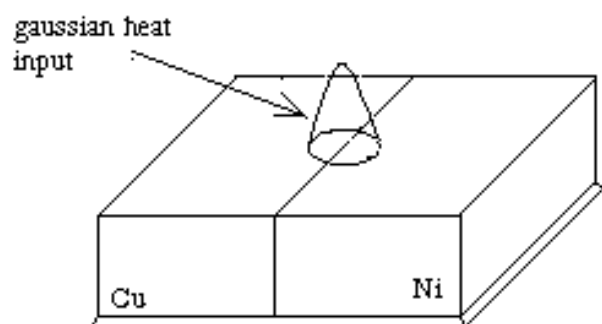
Schematic sketch of the dissimilar metal welding
